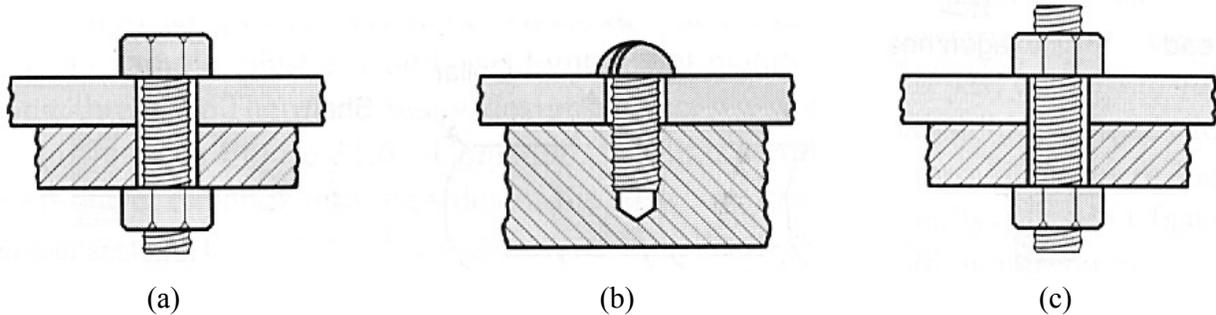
Typical assemblies using (a) bolt and nut, (b) screw and (c) stud and nut.
